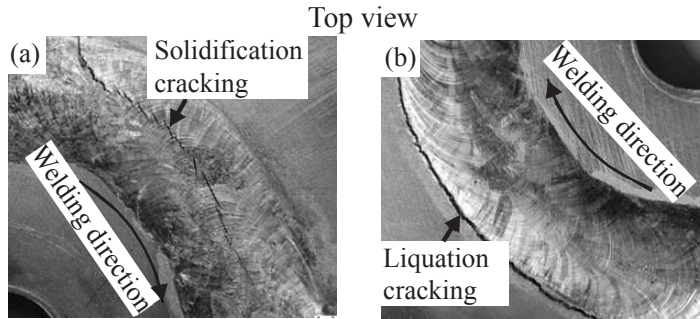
(a) Solidification cracking and (b) liquation cracking during circular patch welding of Al alloys. With permission from reference [34].
